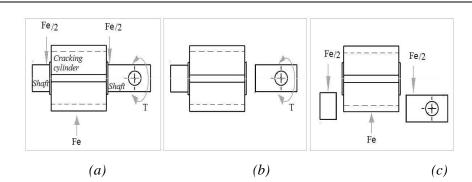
Modes of failure of Cracking cylinder (a) Forces and torque acting on Cracking cylinder, (b) Shearing of shaft due to twisting, (c) Shearing of shaft due to bending
